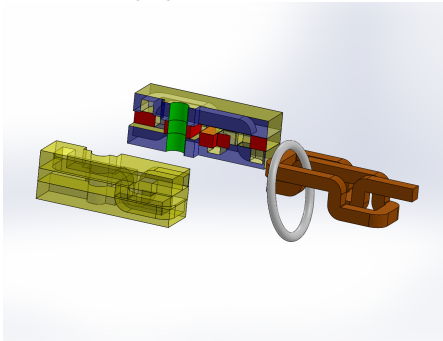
shows an example of a constructed fixture. Although we omit the proof of the theorem, we summarize the approach, since we will need it to describe how to build easily disassemble-able arrangement fixtures around rods. We assume that the string has some non-zero thickness. The Gauss code is the sequence of junctions, each of which is denoted as an over-crossing (o) or an under-crossing (u), as we walk along the string [12]. First, make a cut in the knot diagram between each pair of crossings, dividing the curve into sections that each contain a single crossing, either “over” or “under”. Call the set of sections with over crossings the top layer, and call the collection of sections with under crossings the bottom layer. Lift the top layer vertically out of the page, in the  $z$
